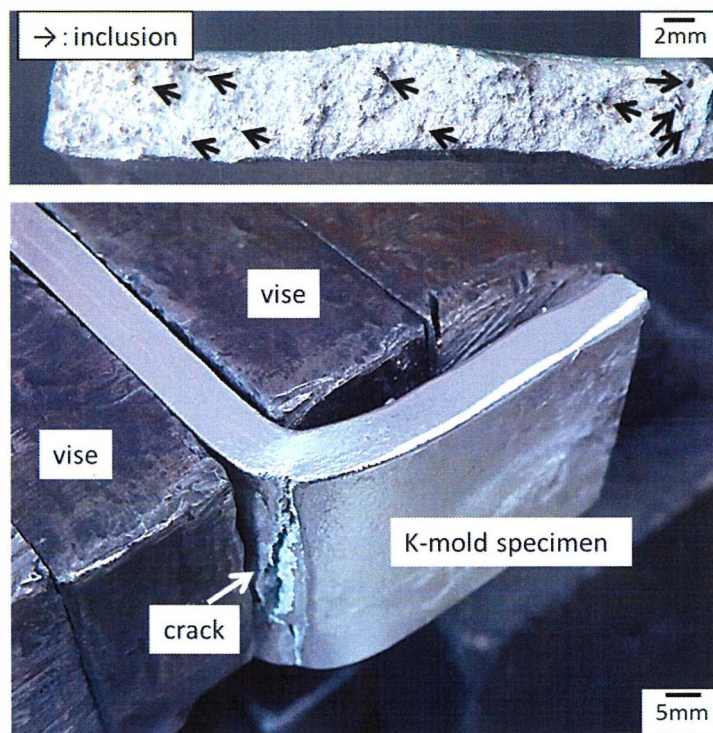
K-mold test specimen of untreated specimen and fracture surface.
